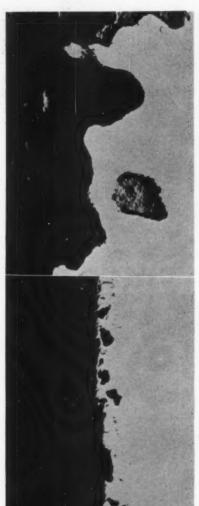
(left) — Casting edge on casting poured in 6 per cent resin-silica sand shell mold. 13 ×.
